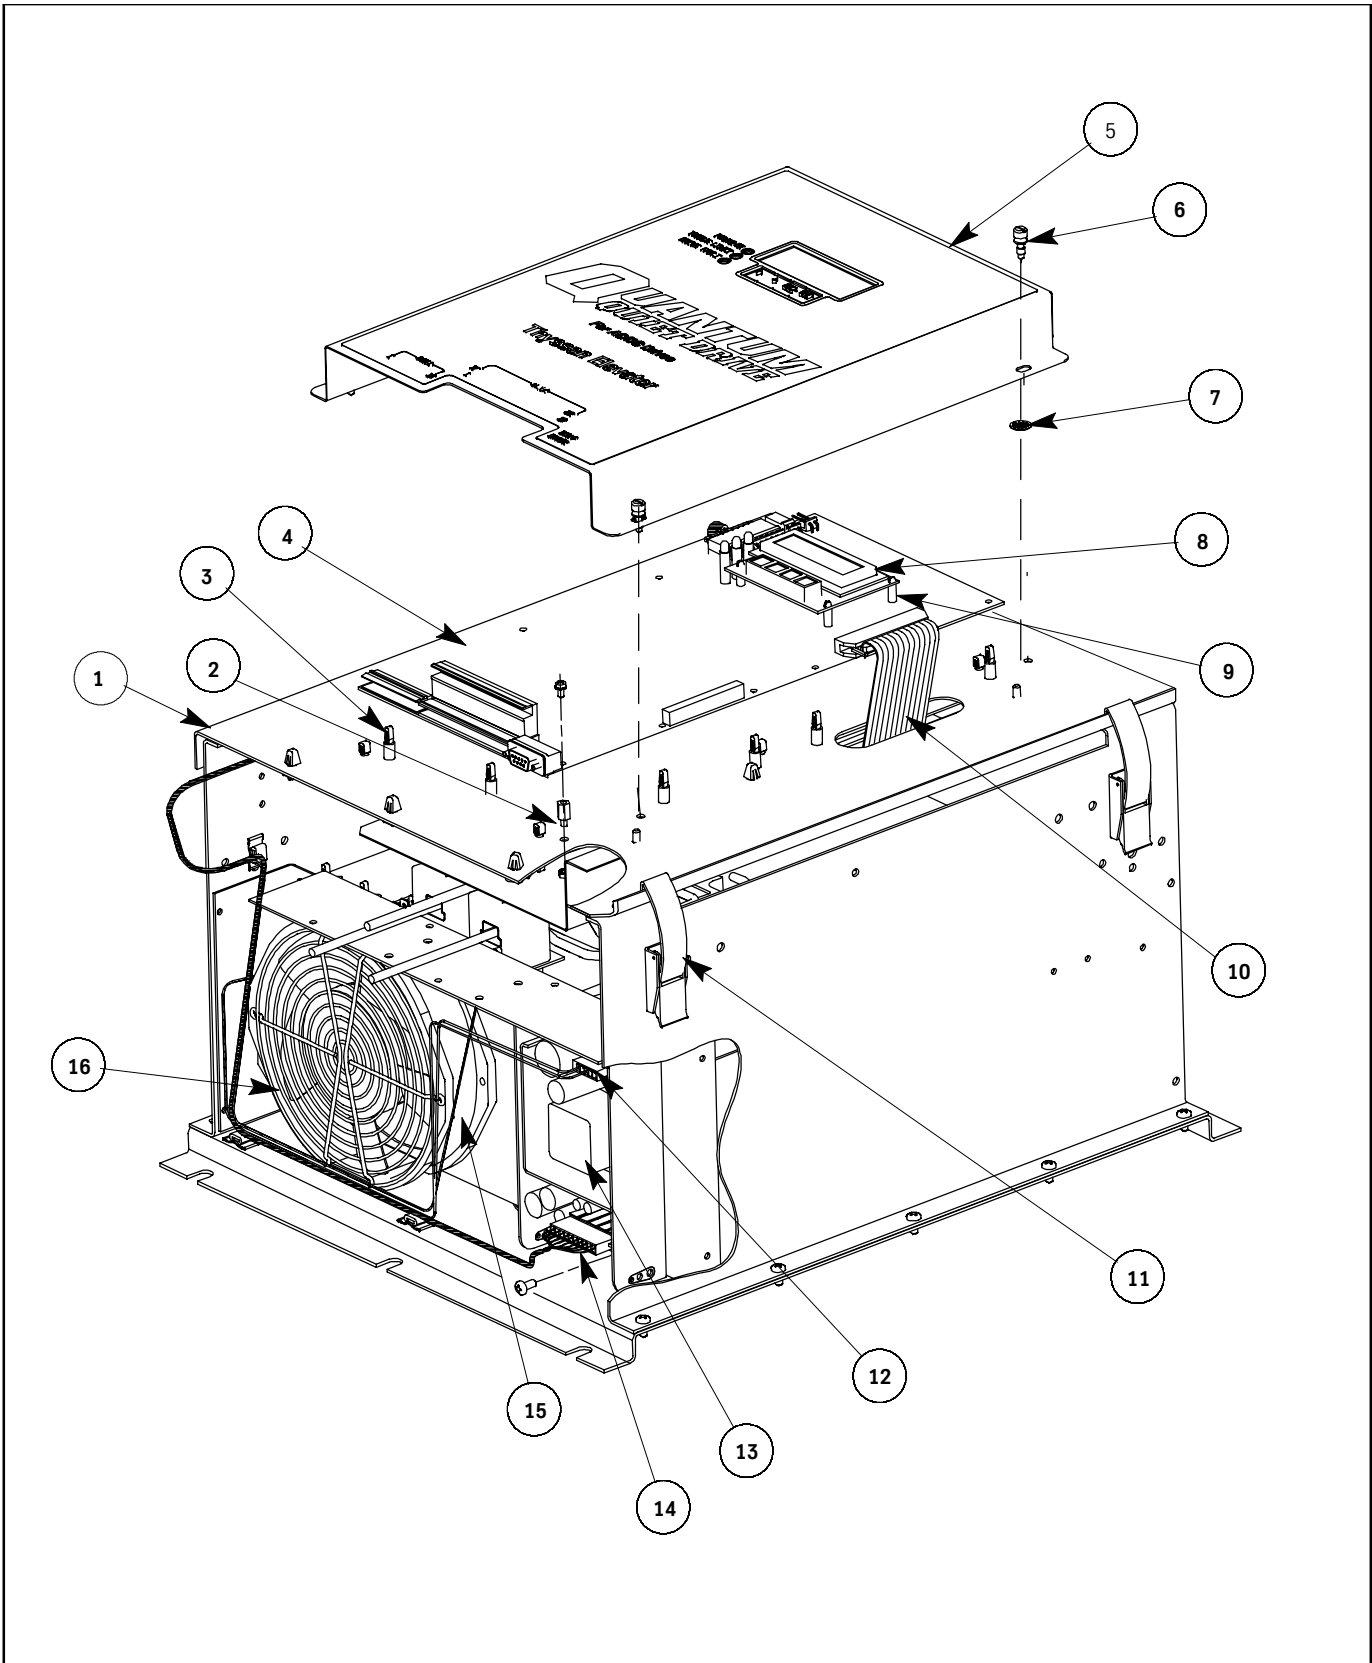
2109AP, 230V, Stand Alone, Non-Regenerative, Drive Assembly
